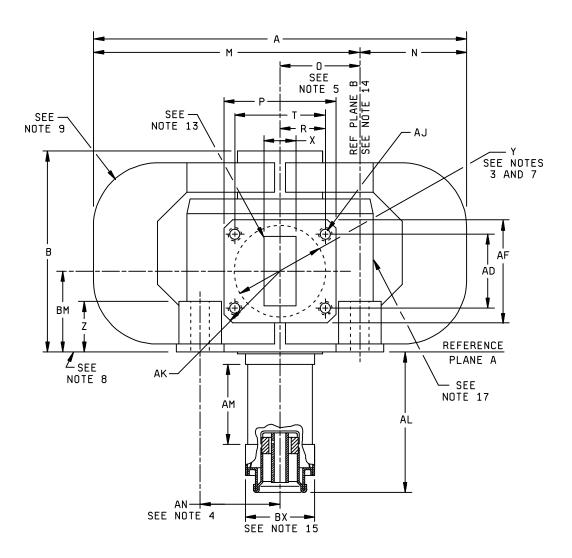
A. Alternate outline drawing of electron tube type DOD-042 (front view).
